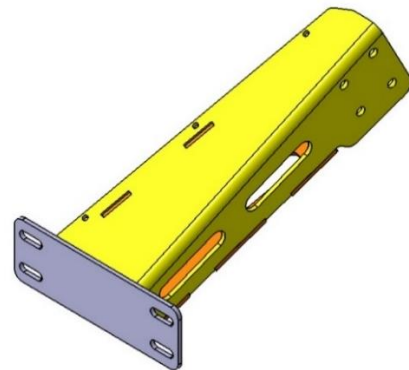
Available Bumper Bracket (Front)(s500 8mm)
